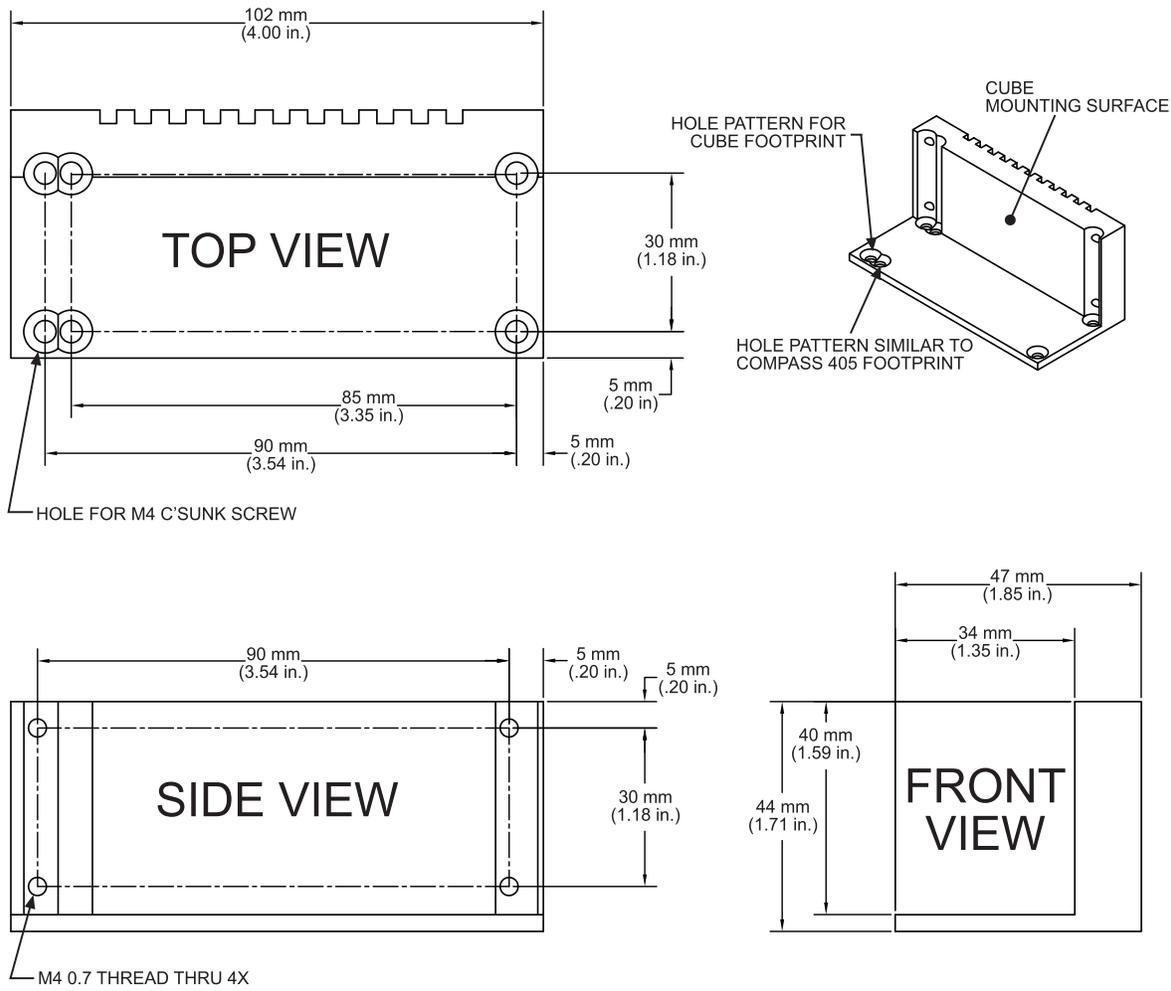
Dimensions: Right-Angle Heat Sink Mount
